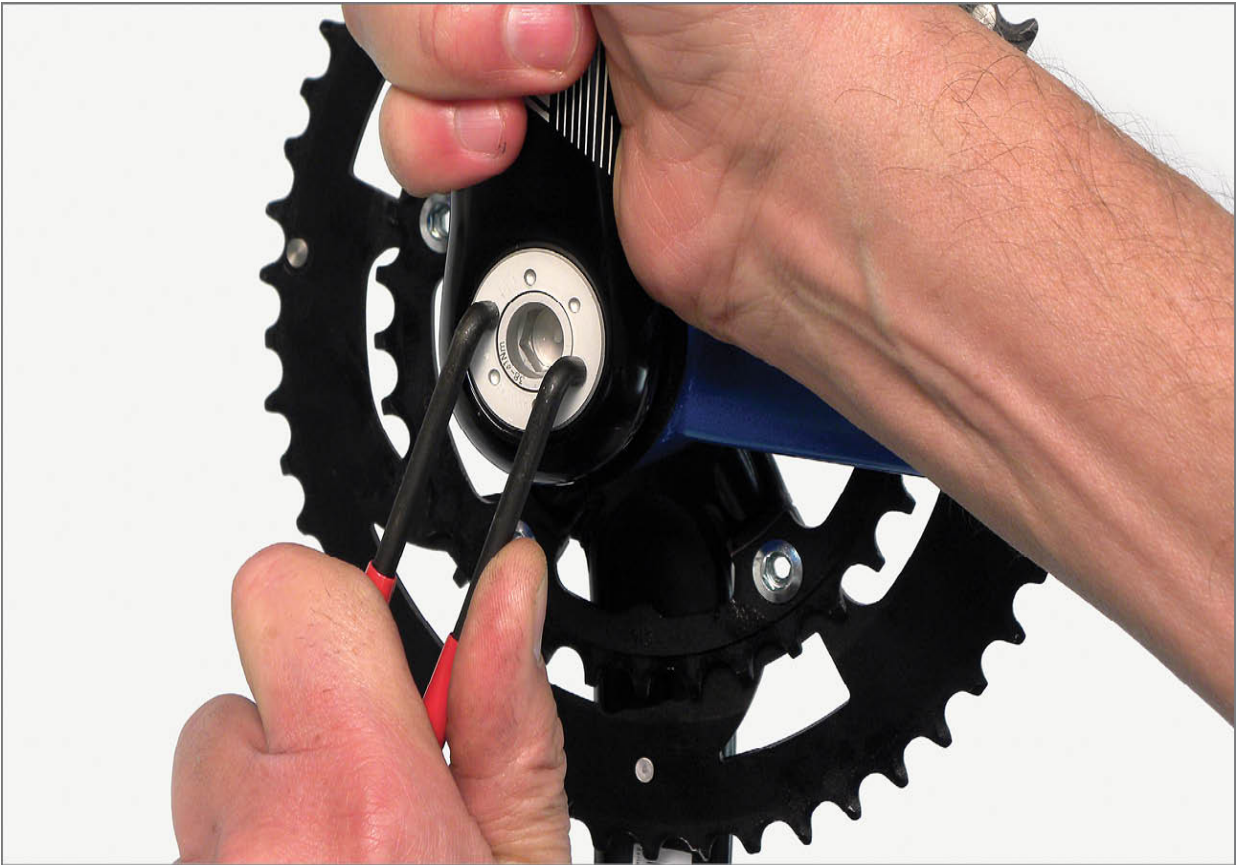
Check security of extracting cap using a Park Tool SPA-2
